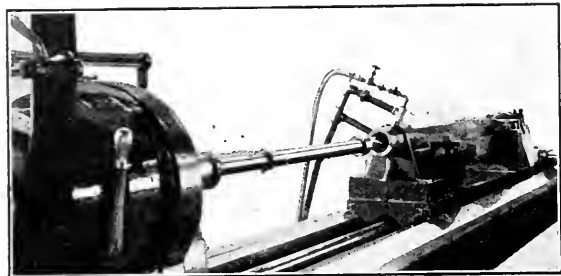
FORGING MOUNTED IN LATHE FOR ROUGH-DRILLING OPERATION
